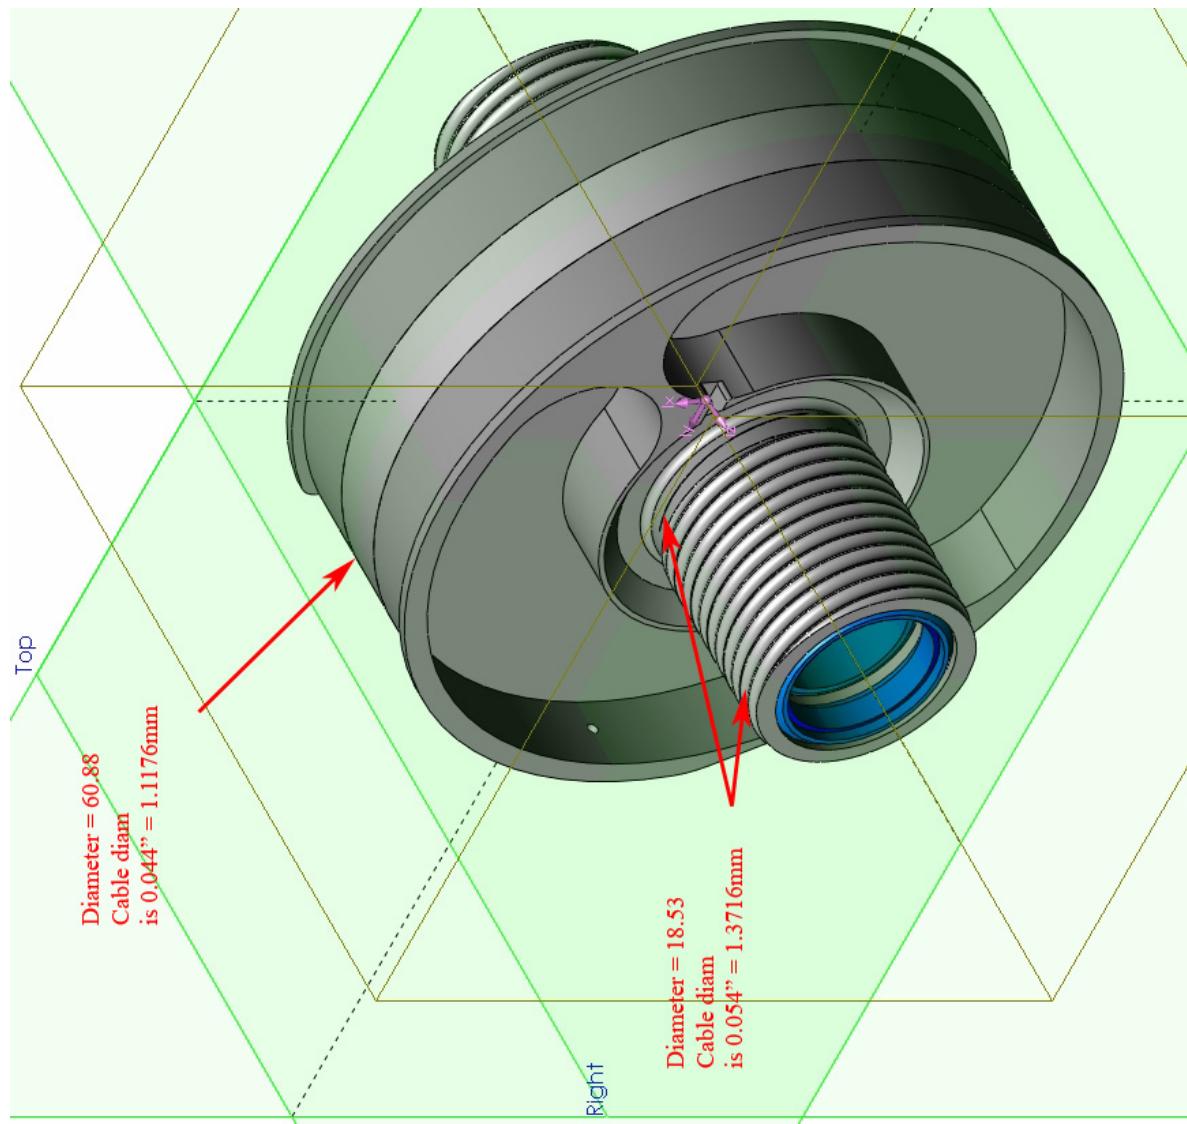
Elbow Pulley-Pinion with all bearings that couples the 1st & 2nd stages of J4.
